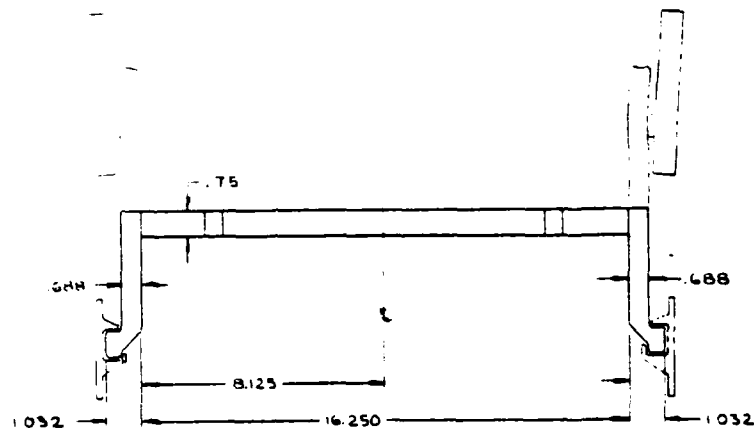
Dimensionalized Drawing of MPES Seat Structure
